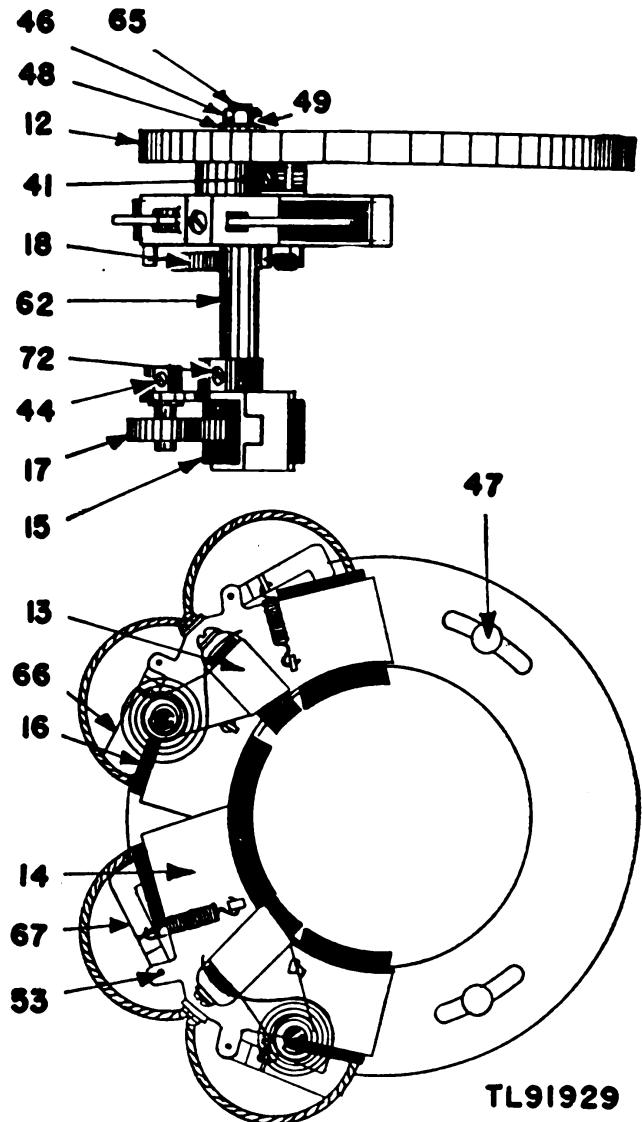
Power Unit PE-75-U, -W, and PE-75-AA, through -AC, engine parts.
